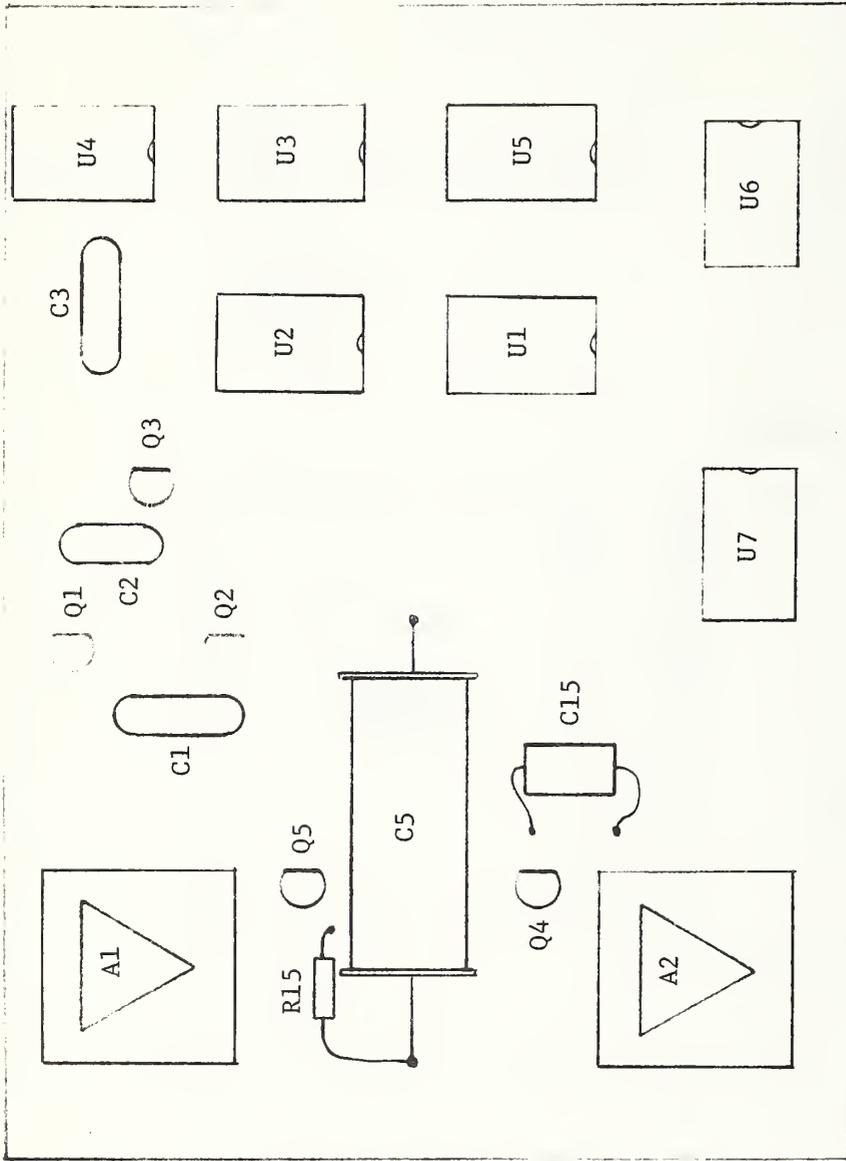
COMPONENT LOCATION, ELECTRONIC CIRCUIT BOARD
